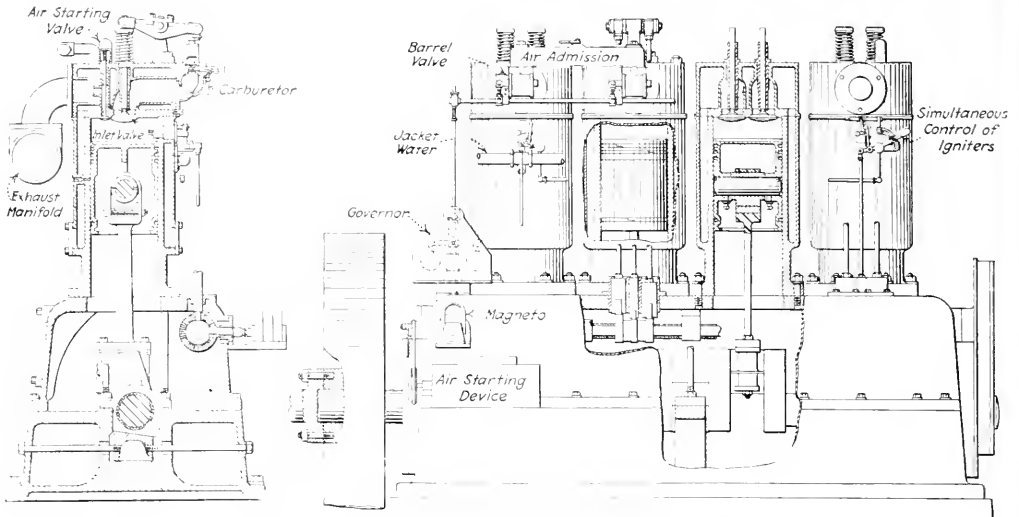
TRANSVERSE SECTION AND LONGITUDINAL VIEW OF LAUSON ENGINE
